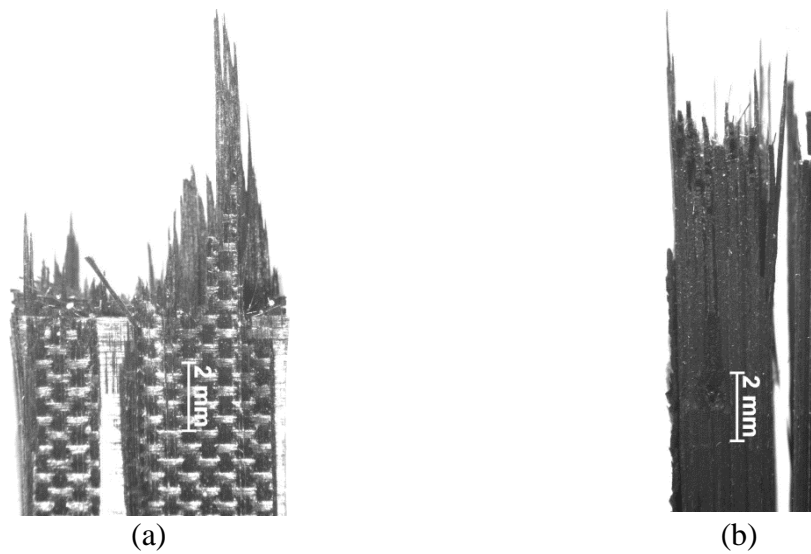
Optical Micrographs of the 0/90 Specimen T42-24 Failed in Tension-Tension Fatigue at 190°C (a) front (b) side view
